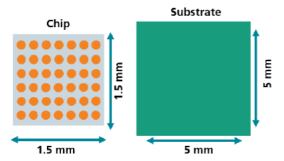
Flip-chip samples with chip dimensions of 1.5mm² and 42 pillars. The substrate with dimensions of 5mm² and PVD surface
